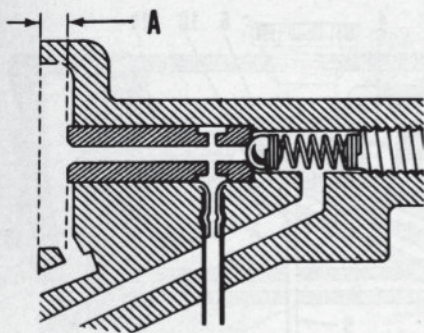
Plunger guide should be 0.125-0.155 inch (A) from end of guide to face of oil tank.
